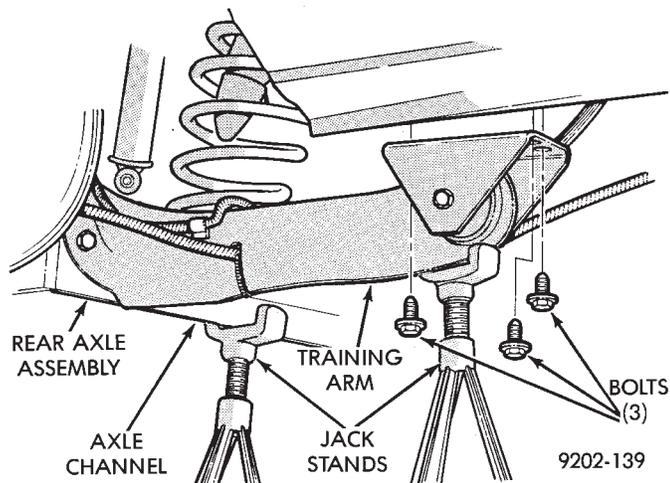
Remove Pivot Bushing Hanger Bracket Bolts
